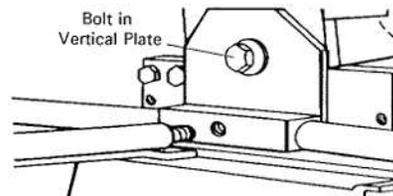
SHARPENER HEAD ADJUSTMENT.
